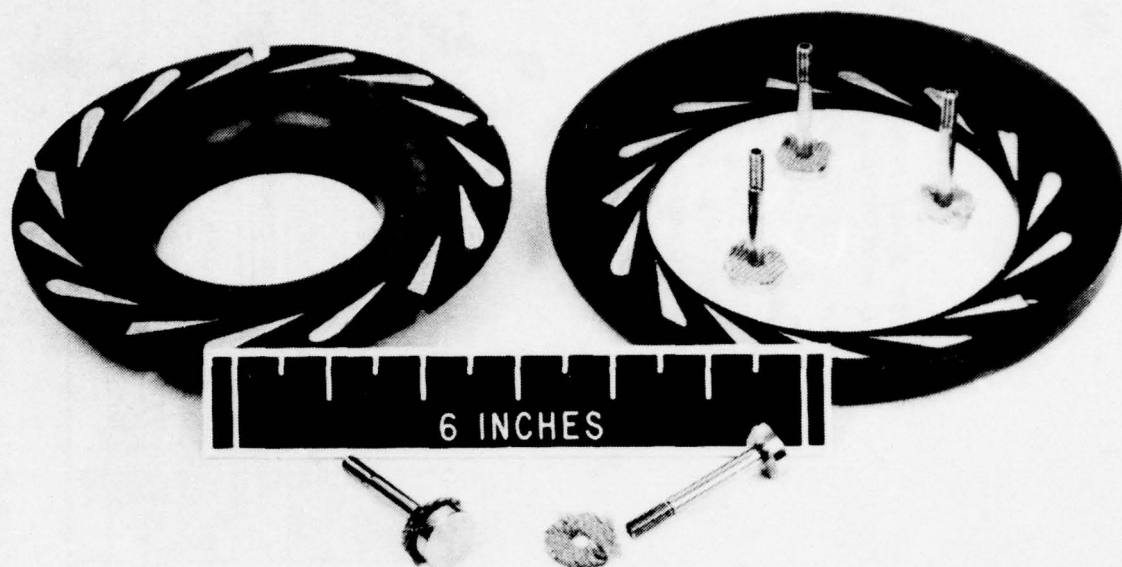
SiC (NC 430) Forward and Rear Shrouds With Rene 41 Mounting Bolts Before Assembly into Test Engine
